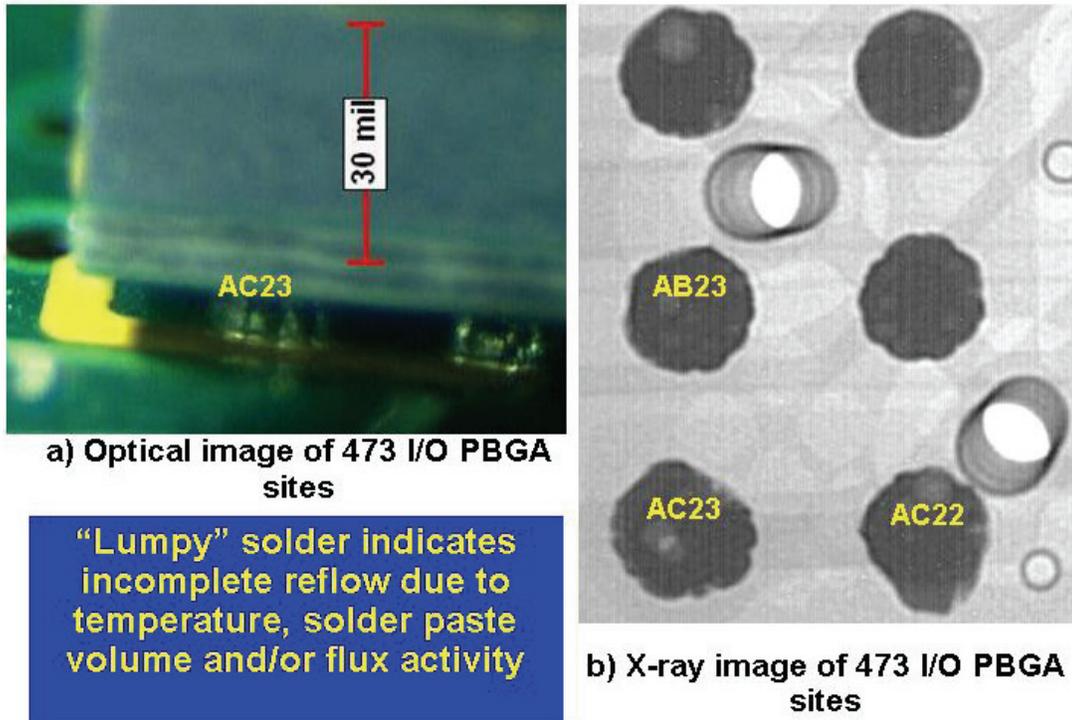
Lumpy solder joints on a 473 I/O 0.8mm pitch PBGA
